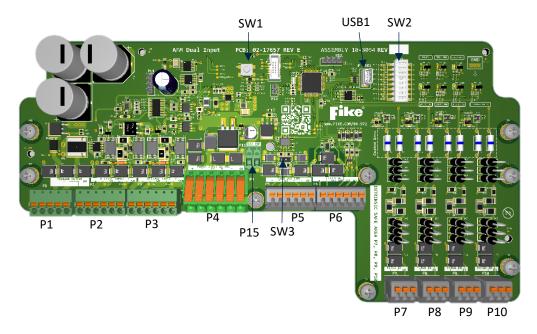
Board Layout, Actuator Field Module (Dual-Input)
